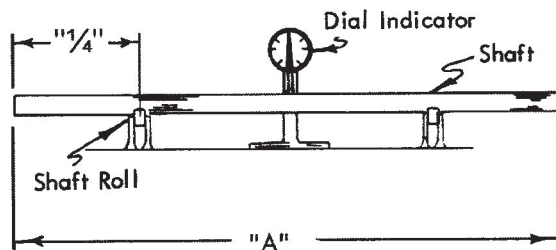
CHECKING SHAFT FOR STRAIGHTNESS
